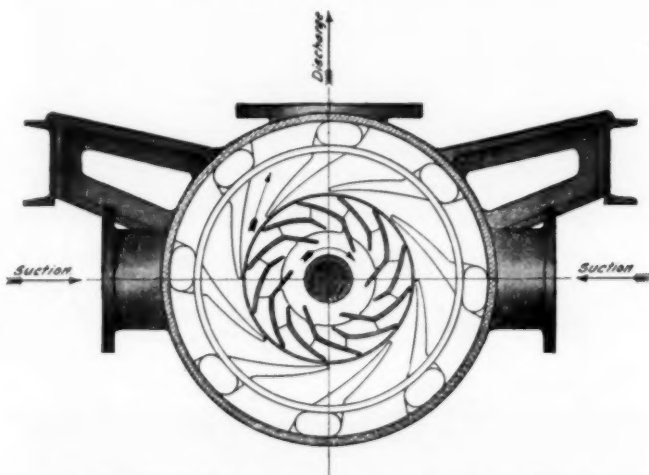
SECTIONAL VIEW OF ONE STAGE OF PUMP, SHOWING IMPELLER AND DIFFUSION VANES
